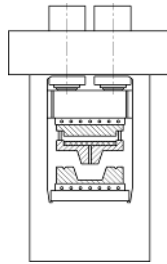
Transfer moulding machine shown with moulding material in transfer cavity
